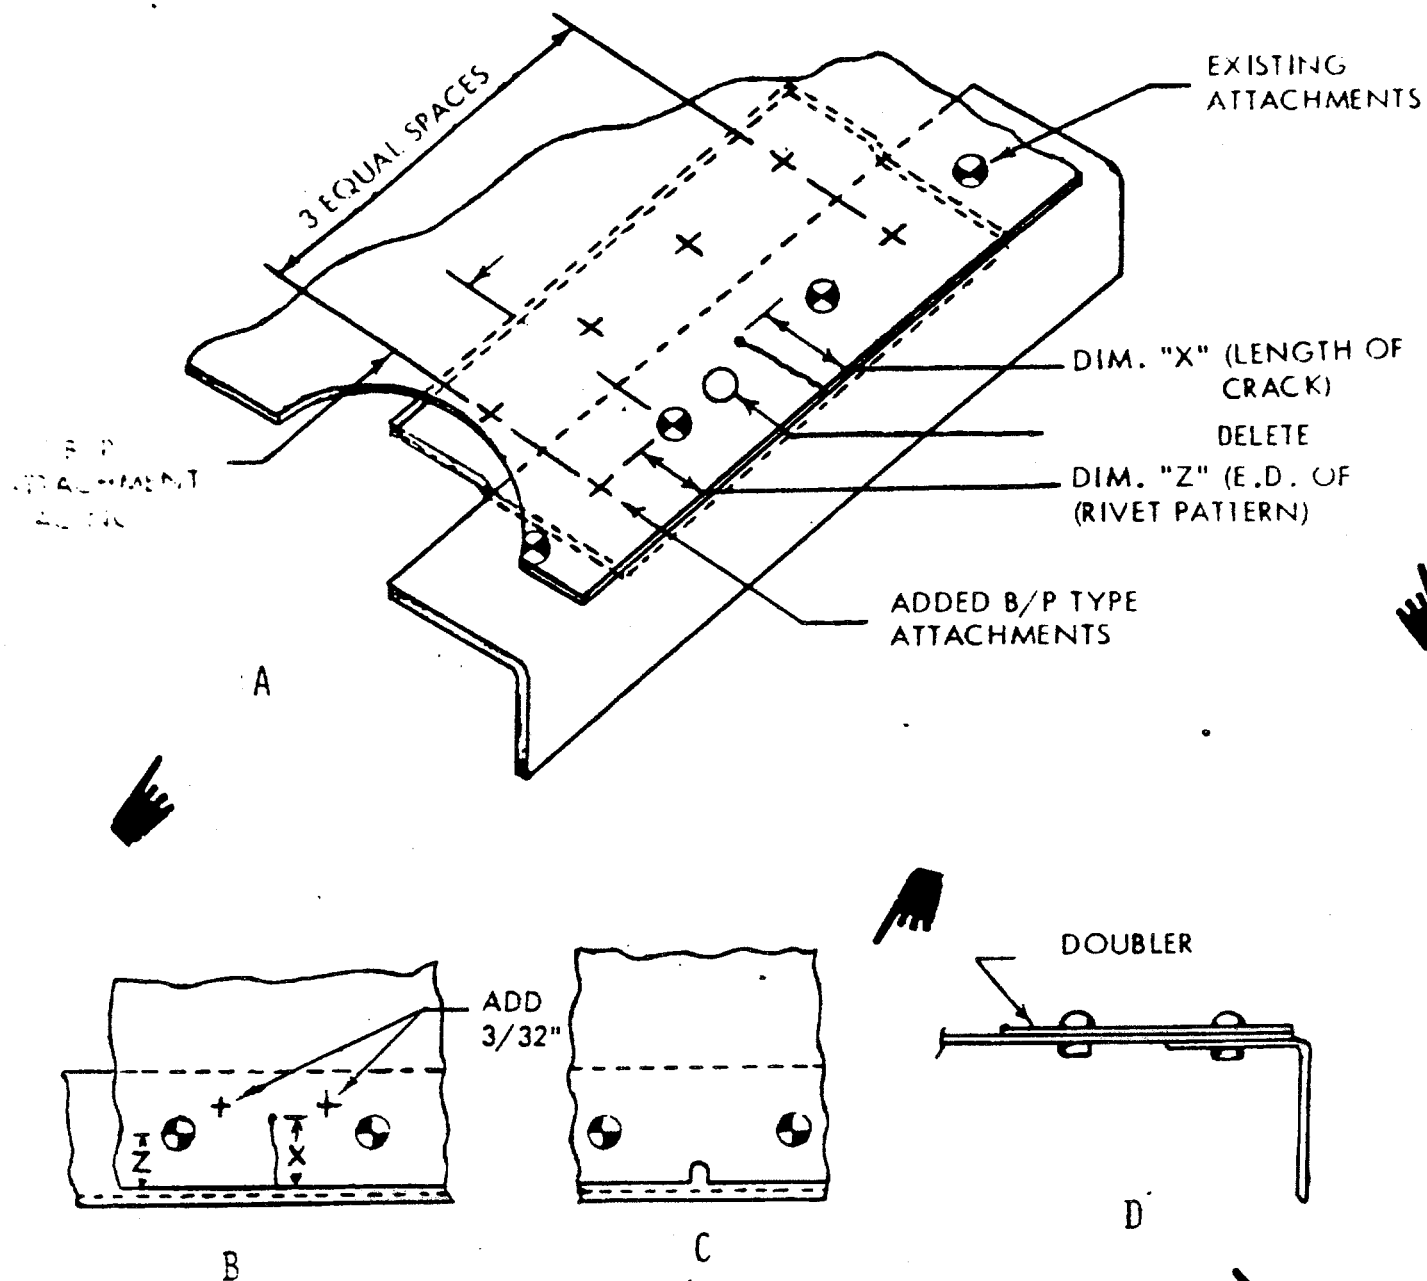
EDGE TEARS IN SKIN AND WEBS
